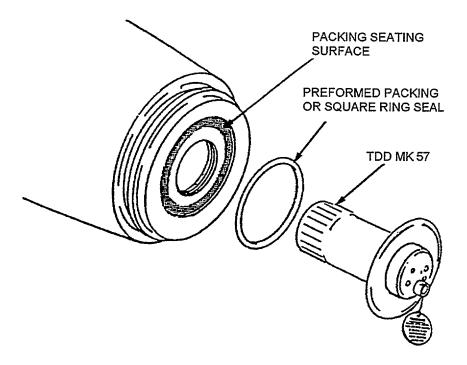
F. Bomb Body Mk 83/BLU-110A/B Inspection Points
